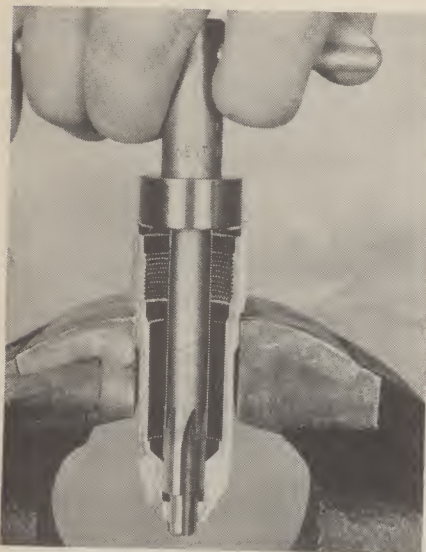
A—Cleaning carbon from spray tip seat in injector nut with GM tool J4986-1.
